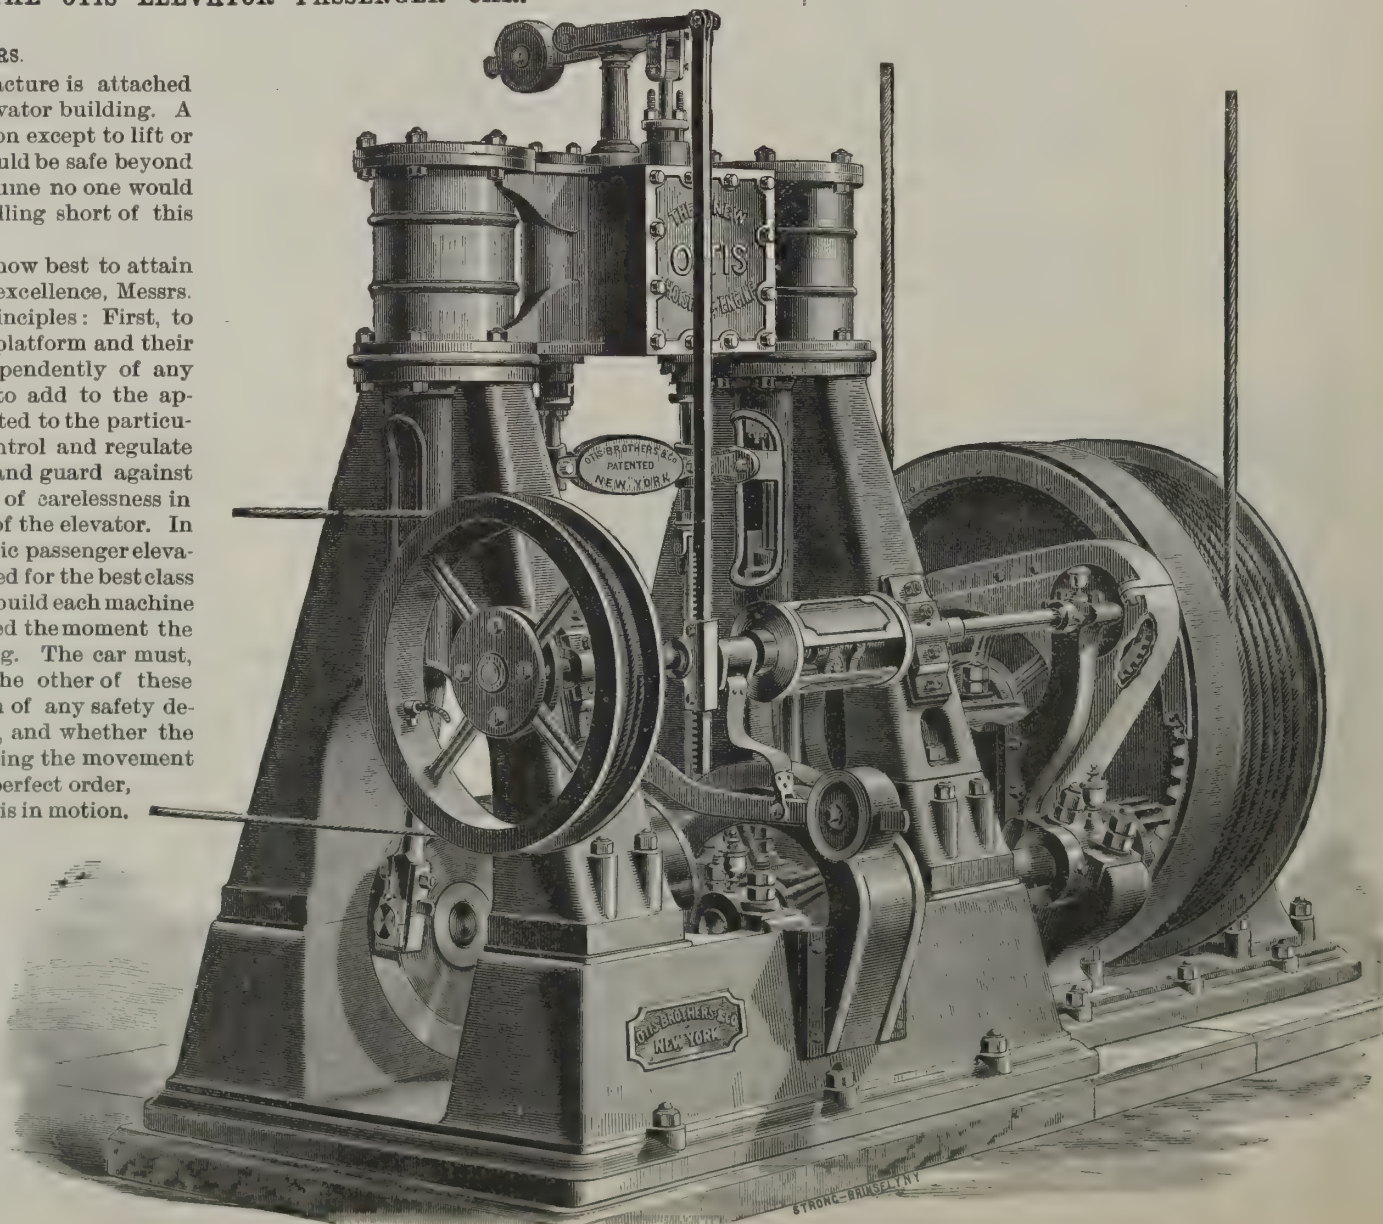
THE OTIS STEAM PASSENGER ELEVATOR ENGINE.
